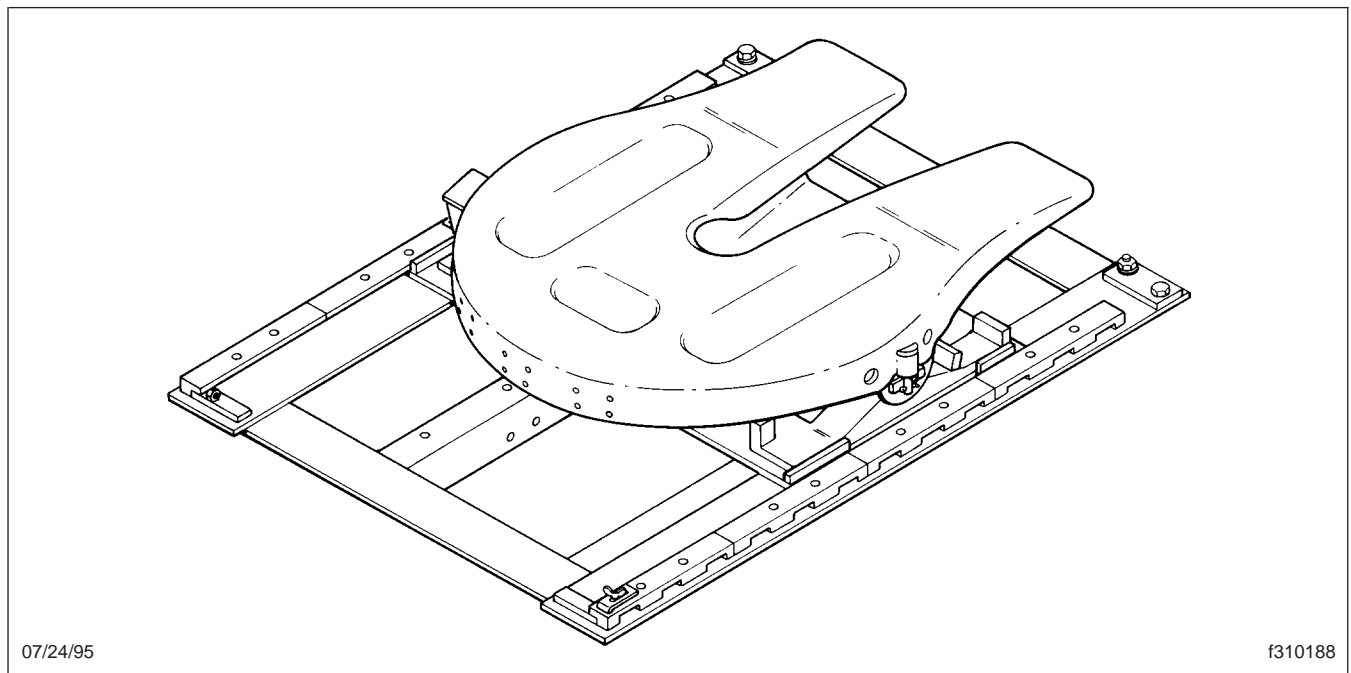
, Fontaine 5000/6000 Series Fifth Wheel and Sliding Mount
